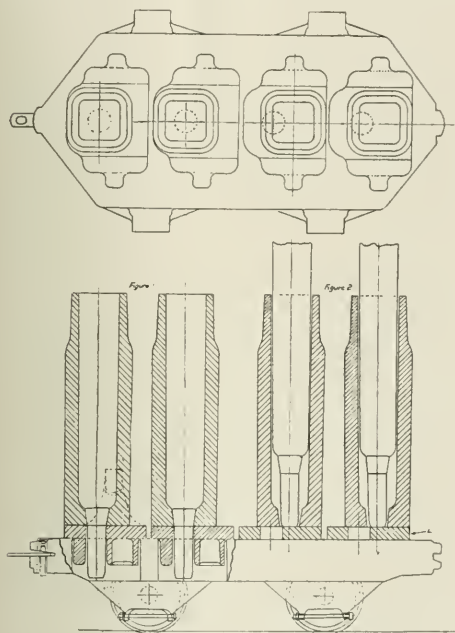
INGOT MOLDS FOR PRODUCING SOUND CASTINGS
